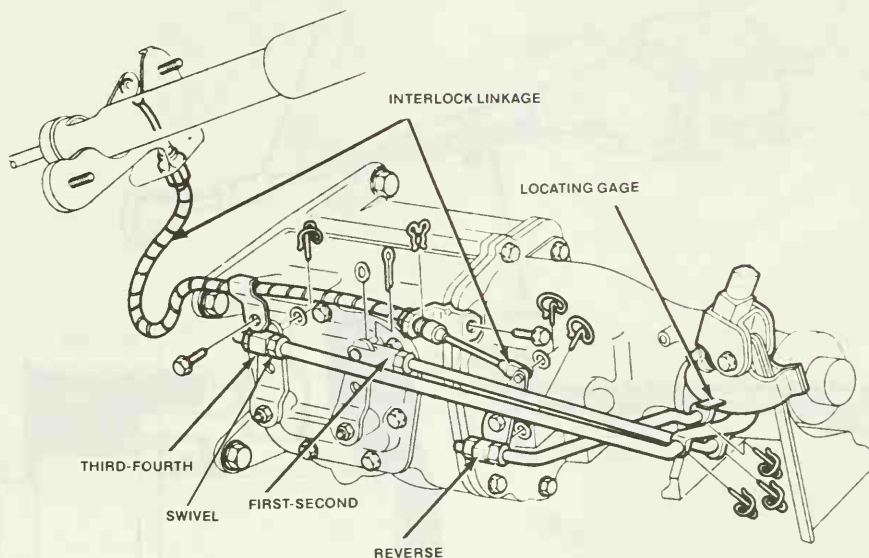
A locating gage is used to adjust shifting linkage. (Chevrolet Motor Division of General Motors Corporation)
